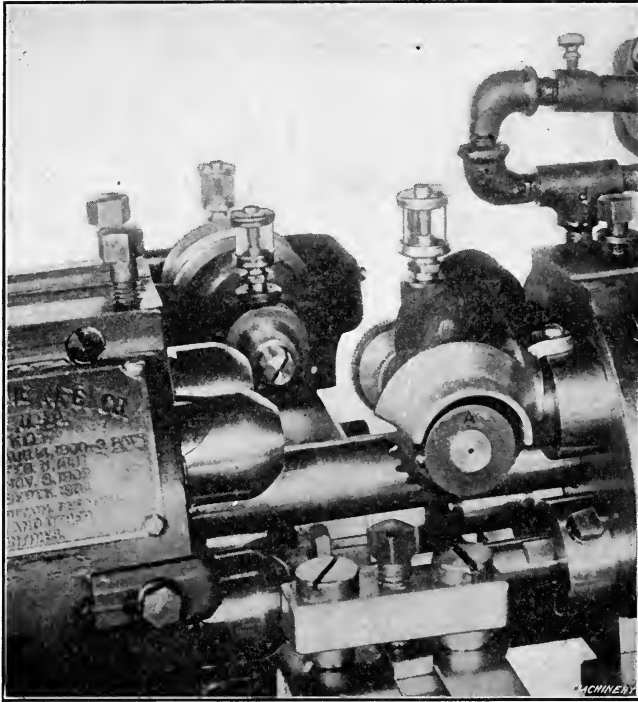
Acme Slotting or Milling Attachment held in Third Position and Driven from Gears in Second Position Tool-spindle
